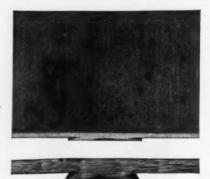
(Top)—Top view showing cladding on piece of welded stainless-clad steel, which has been subjected to salt spray test. (Bottom) Cross sectional view of same piece.
